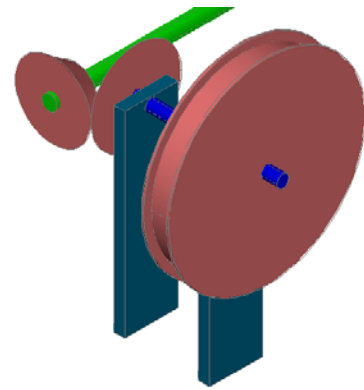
Bevel gear transmitting power from the main shaft to pulley
